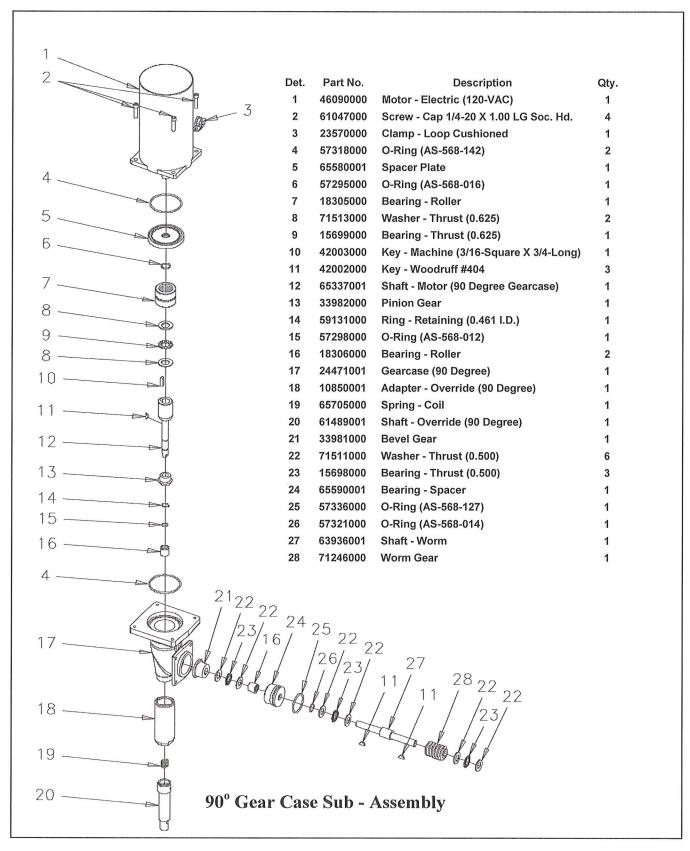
New Design - Part Number 81612001 90° - Gear Case Sub – Assembly
